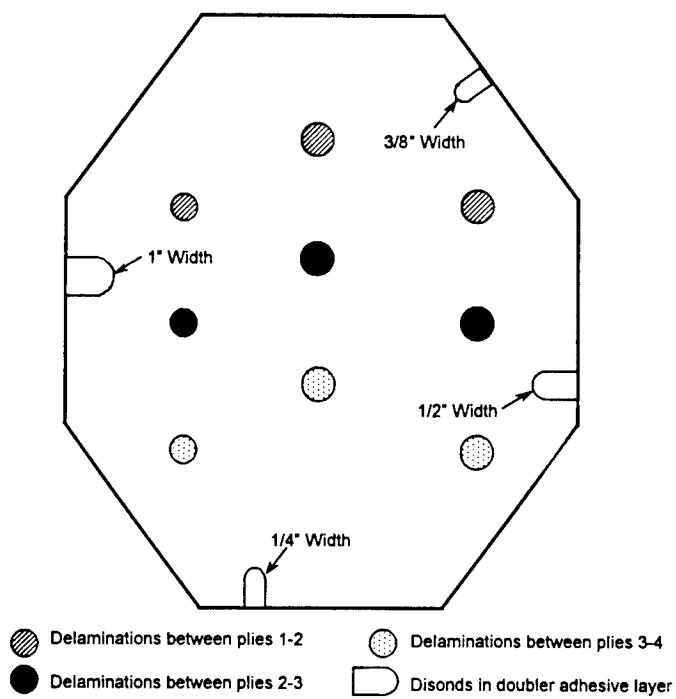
Schematic of 737 Testbed Doubler Showing Engineered Flaws
